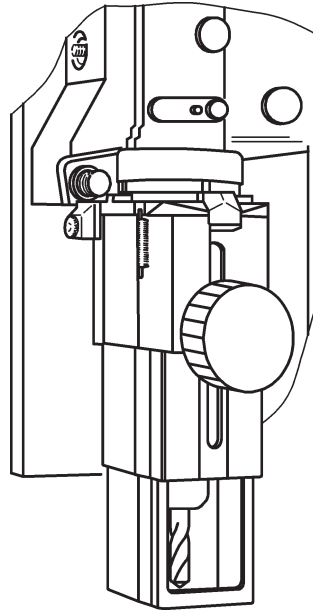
Example of an adjustable guard for a radial or pedestal drilling machine
